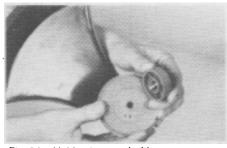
Hold outer spool with one hand and unscrew bump knob in counterclockwise direction. Inspect bump knob to be sure it can freely move axially on the captured bolt.
